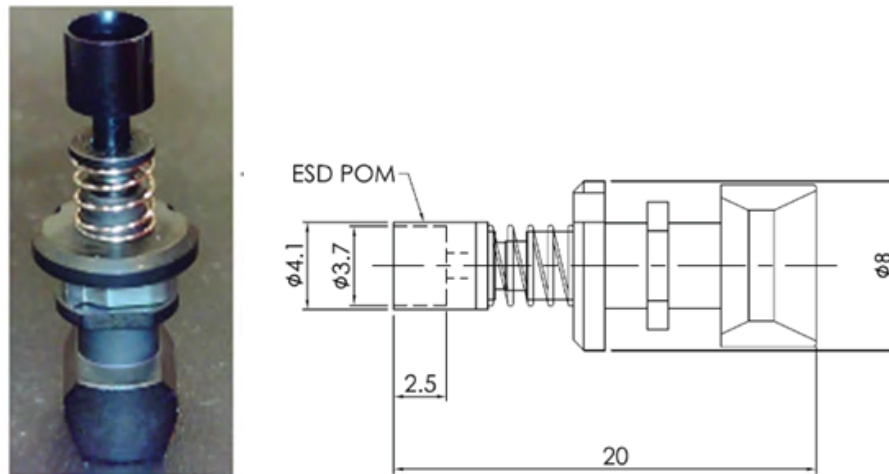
Standard off-the-shelf nozzle “YSM20” (inner diameter 3.7mm, outer diameter 4.1mm) for Yamaha YS-12 machine.
